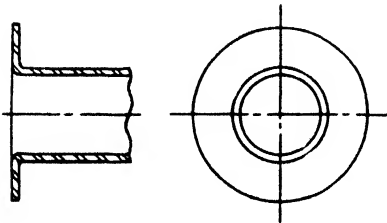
Extruded hole having a flange to which a tube or shaft is to be welded, brazed, or soldered.
